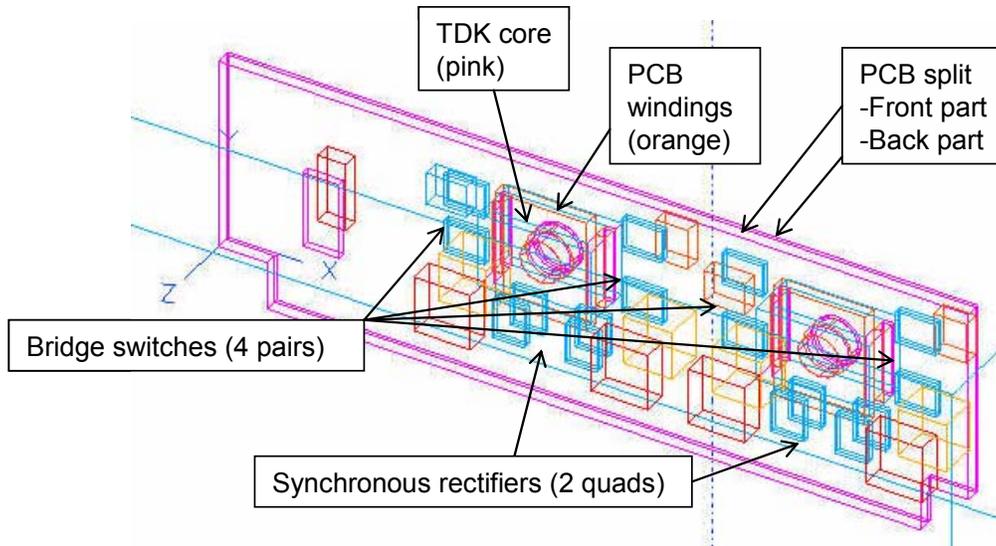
Wireframe drawing showing PCB split and heat sources
